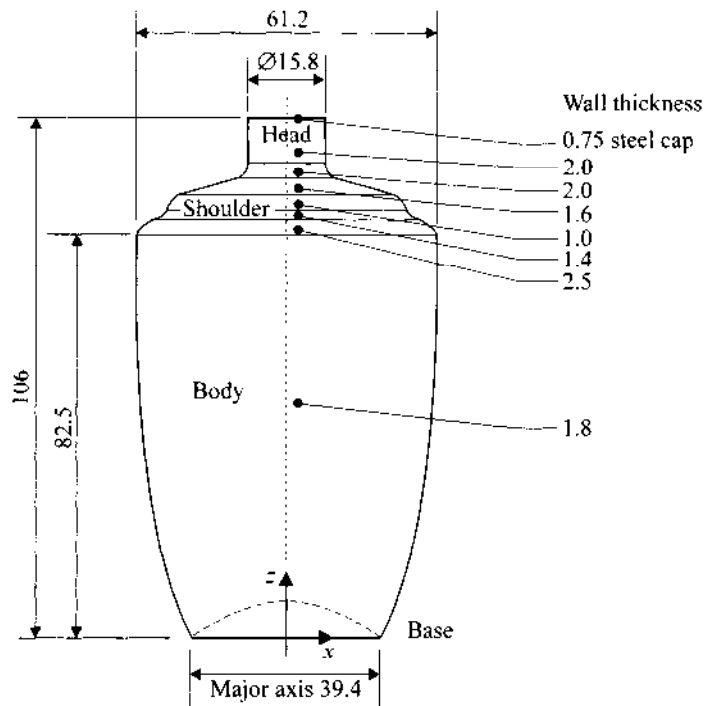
Geometry of the pressure vessel. (Dimensions in millimetres.)
